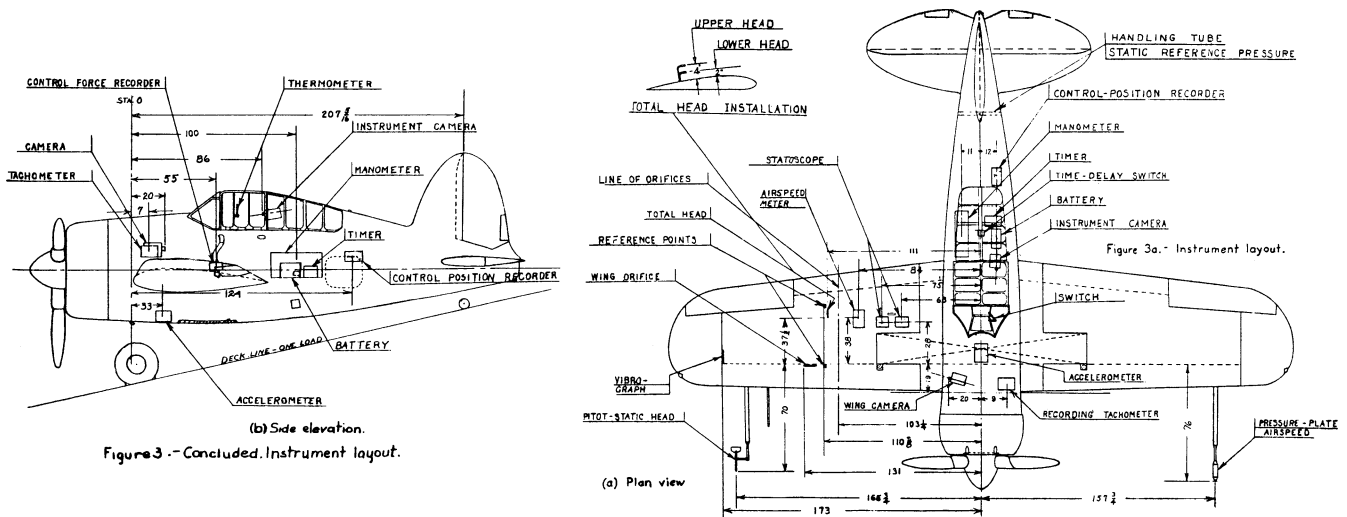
Details of the specially instrumented XF2A-2 at Langley Field, spring 1940.
